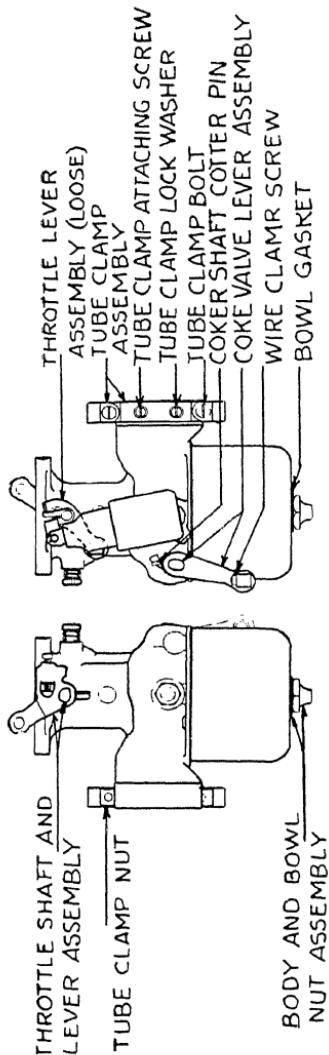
External Construction and Adjustments of Chevrolet "Six" Carter Carburetor
